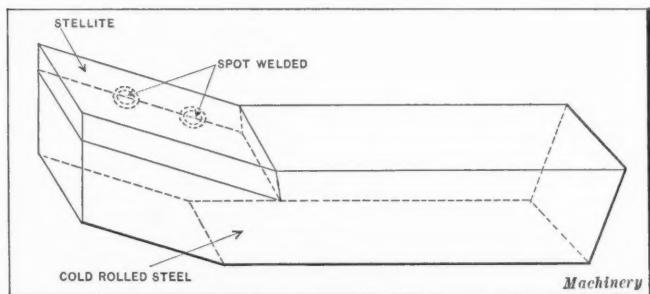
Tool made from Stellite Cutter spot-welded to Machine Steel Shank
